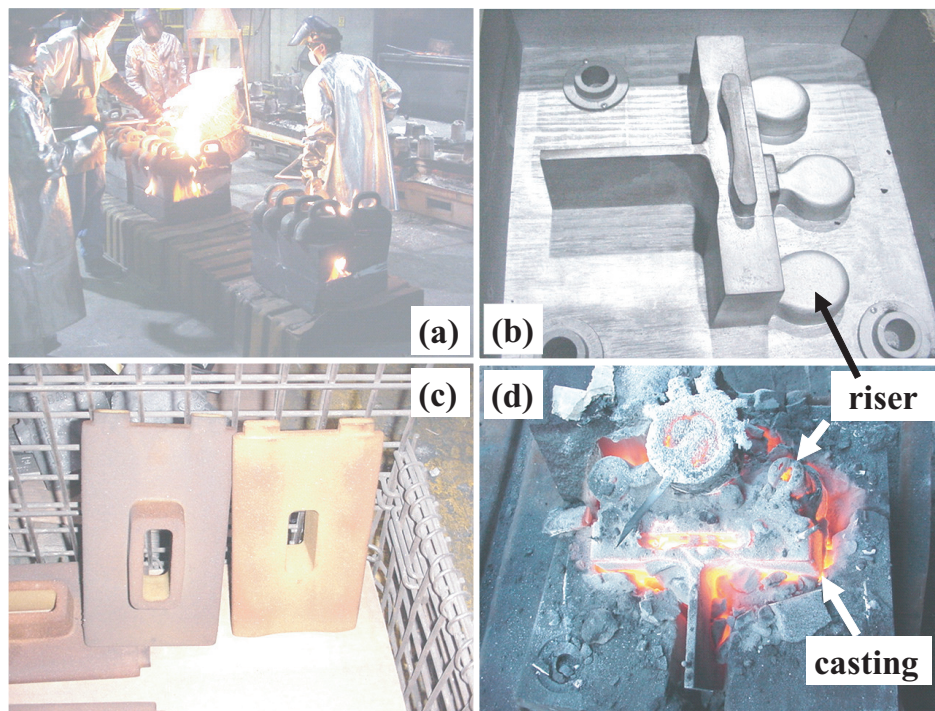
MC casting: (a) filling the mold; (b) pattern; (c) cores; (d) cooling stage.
